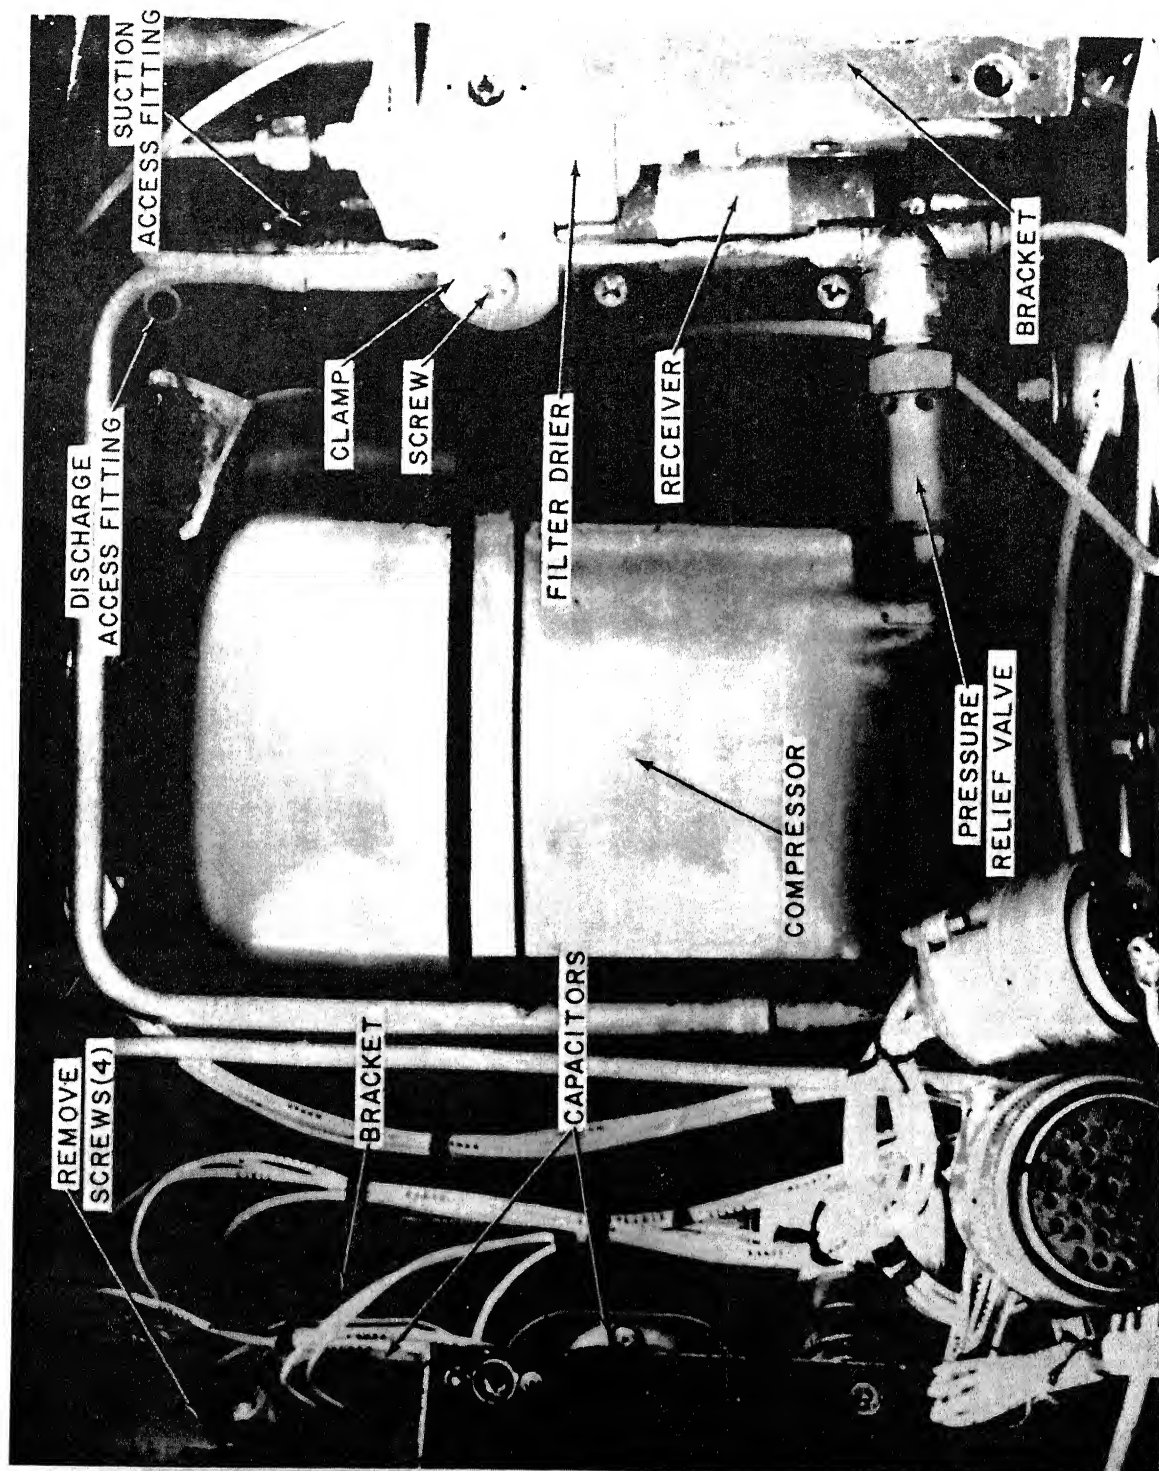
Compressor, Pressure Relief Valve, Receiver, Liquid Line Solenoid Valve, Filter-Drier, Drain Tube, Removal and Installation.
